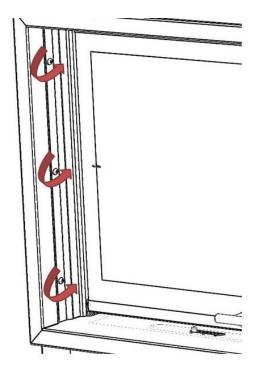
Unscrew the 6 screws that secure the exterior frame
